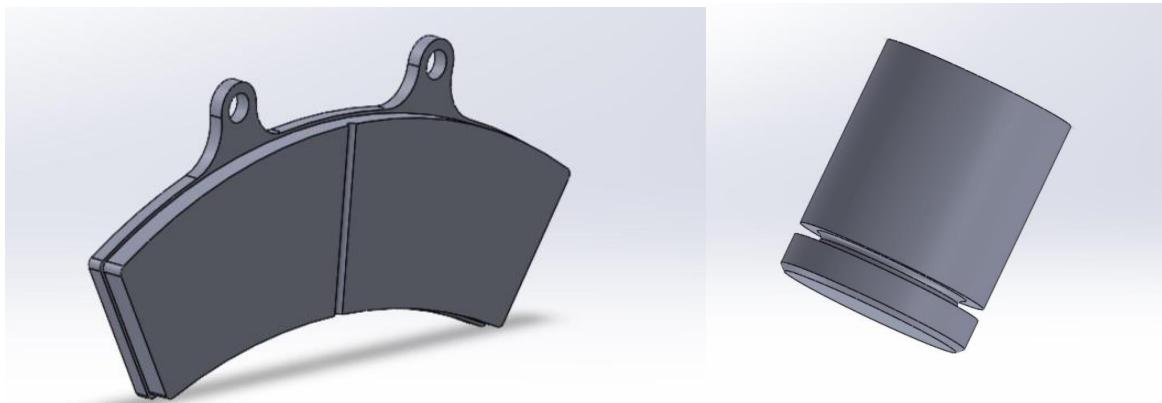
CAD Design of Brake Pad (left) and Piston (right).
